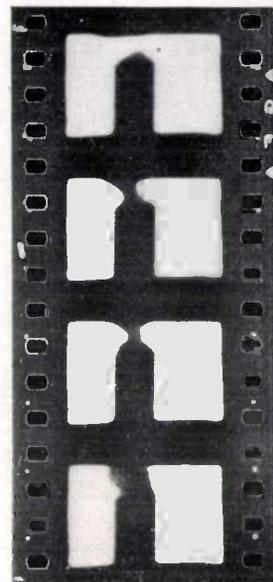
Transfer of liquid material from the welding rod to the piece of work.
